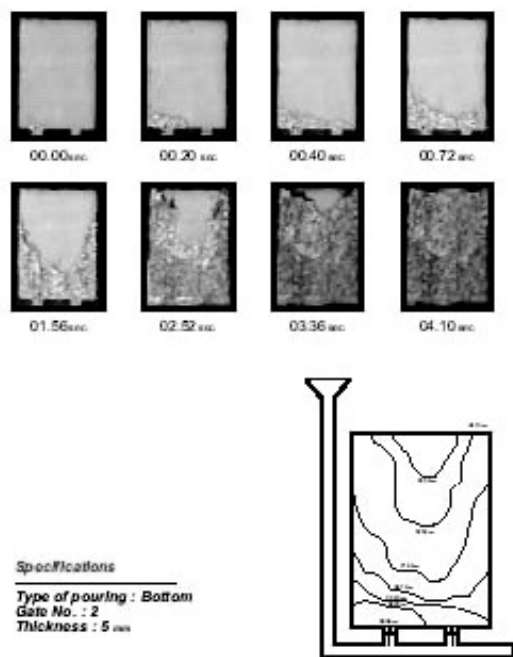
Mold filling behavior in the bottom gating system with 5 mm thickness.
